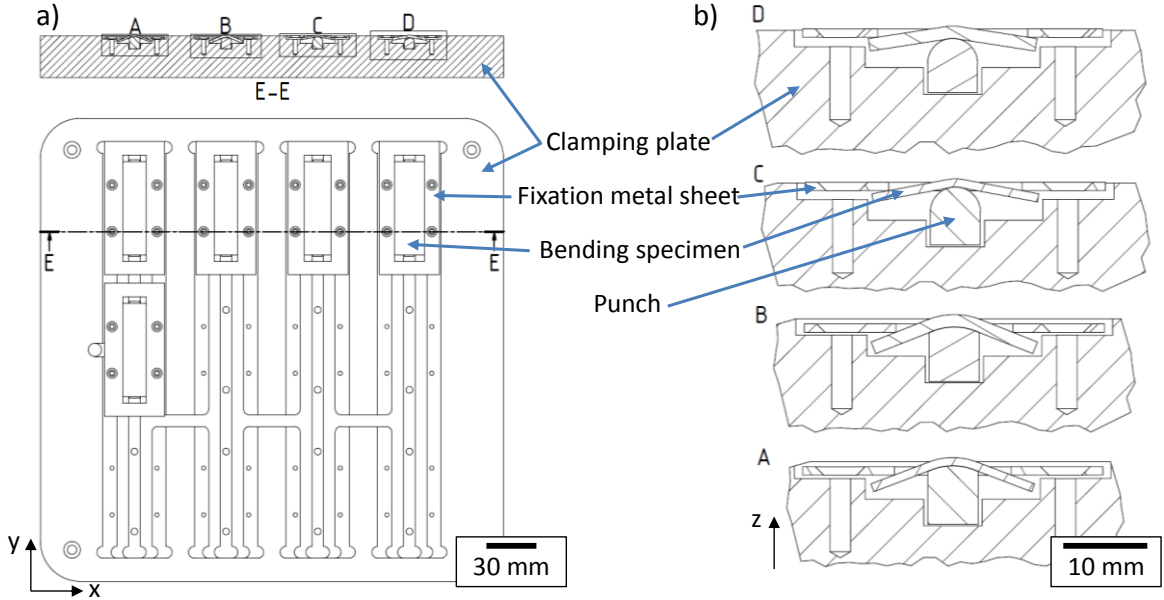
a) Modular clamping device; b) detailed views of exemplarily mounted bending specimens according to Table 1
